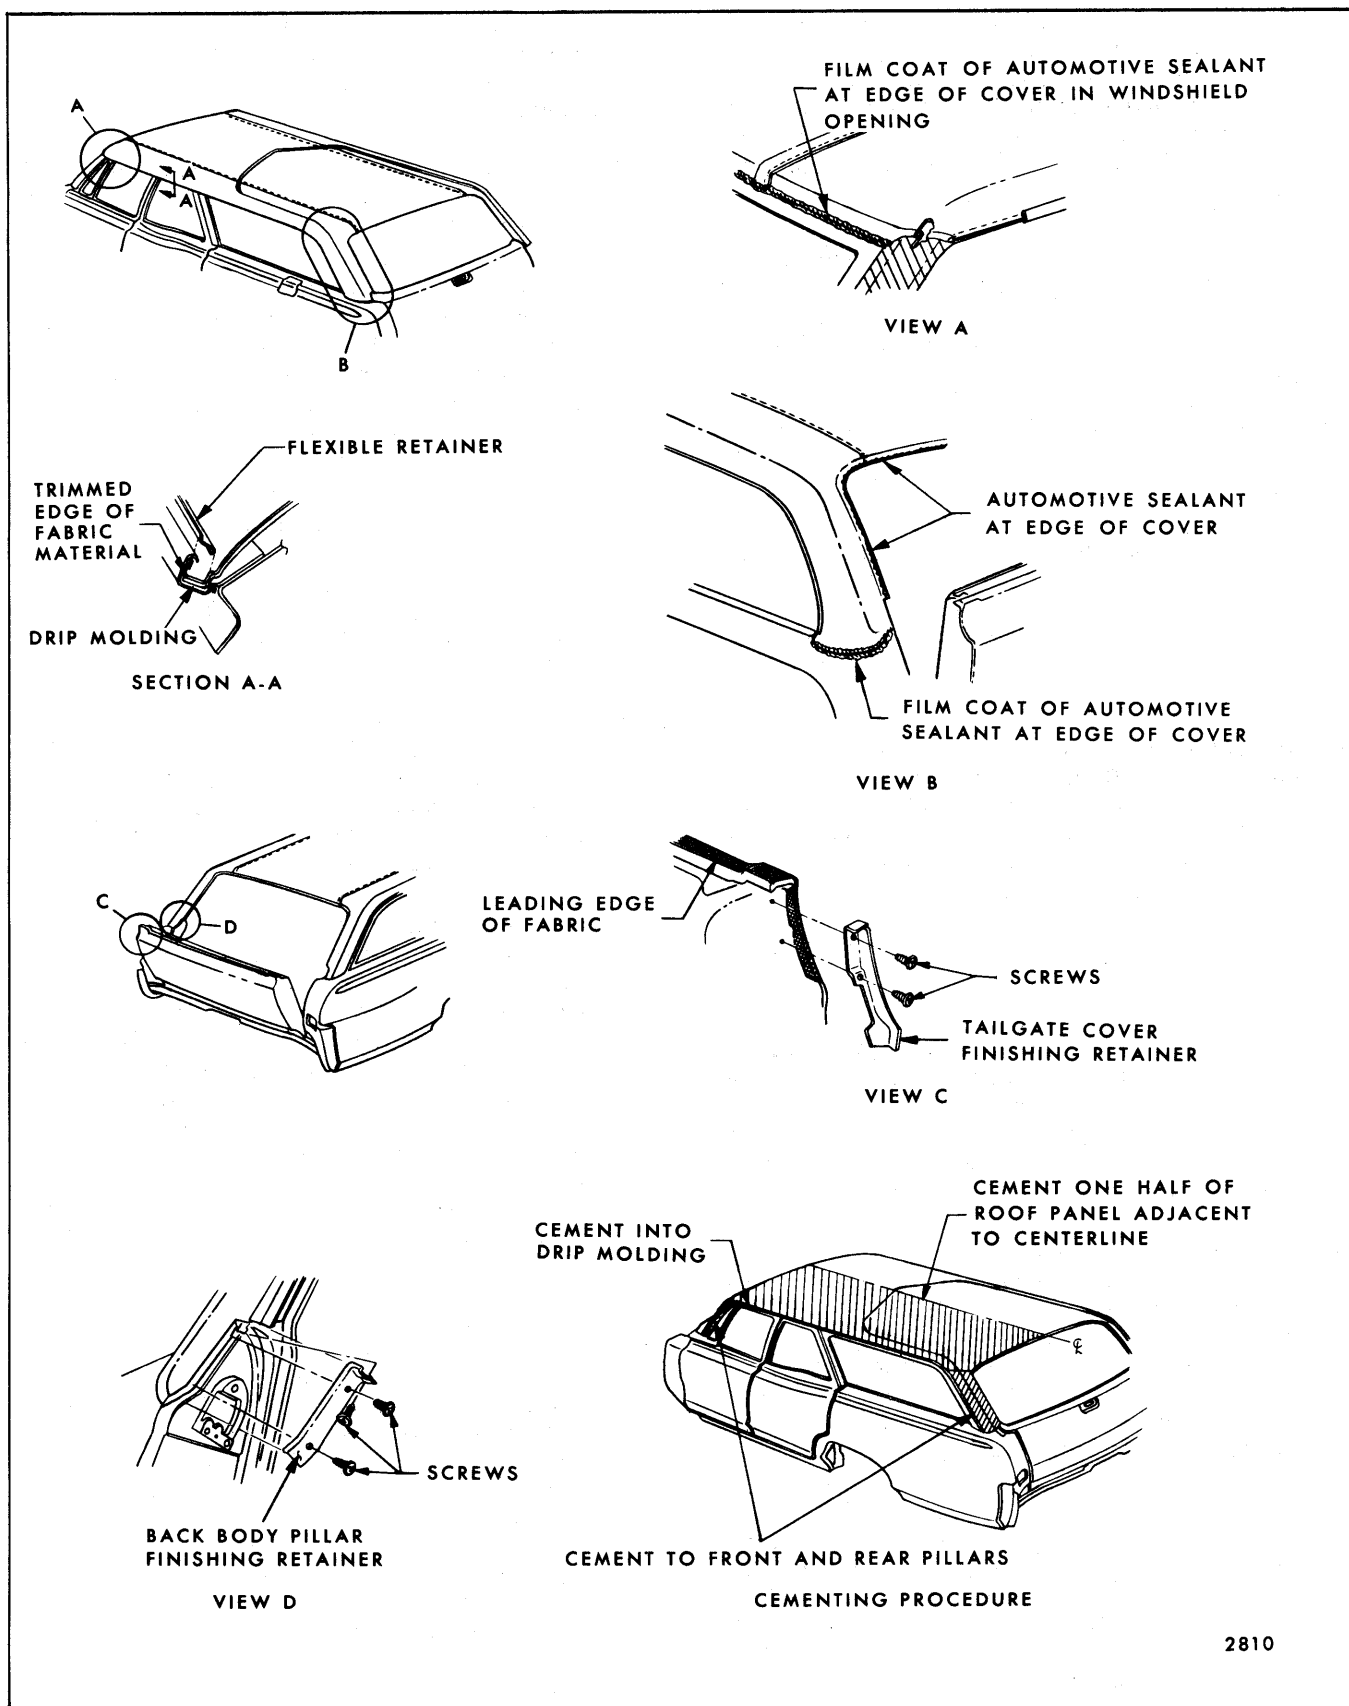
Typical Fabric Roof Cover Installation on Station Wagon Styles
